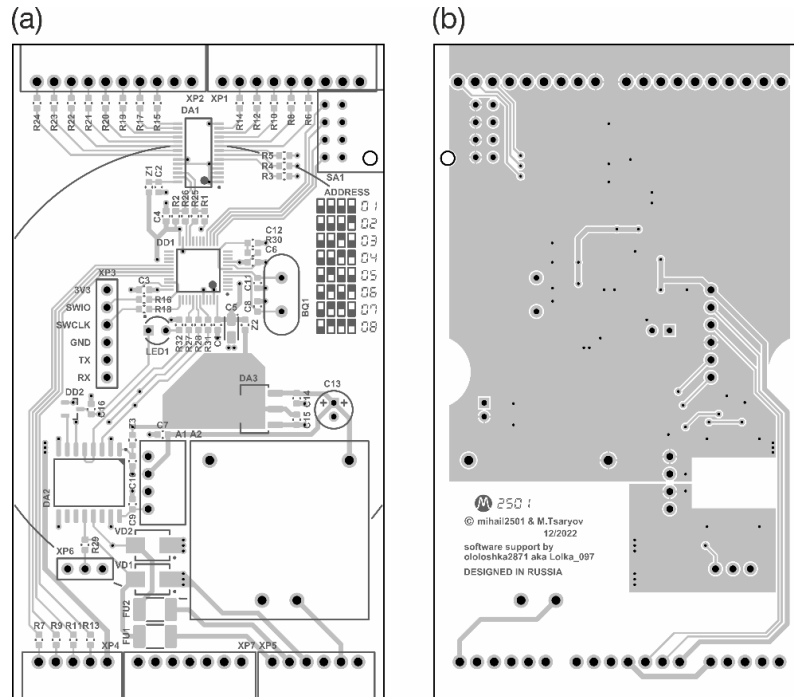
PCB layout of PWM generator: (a) top layout; (b) bottom layout.
